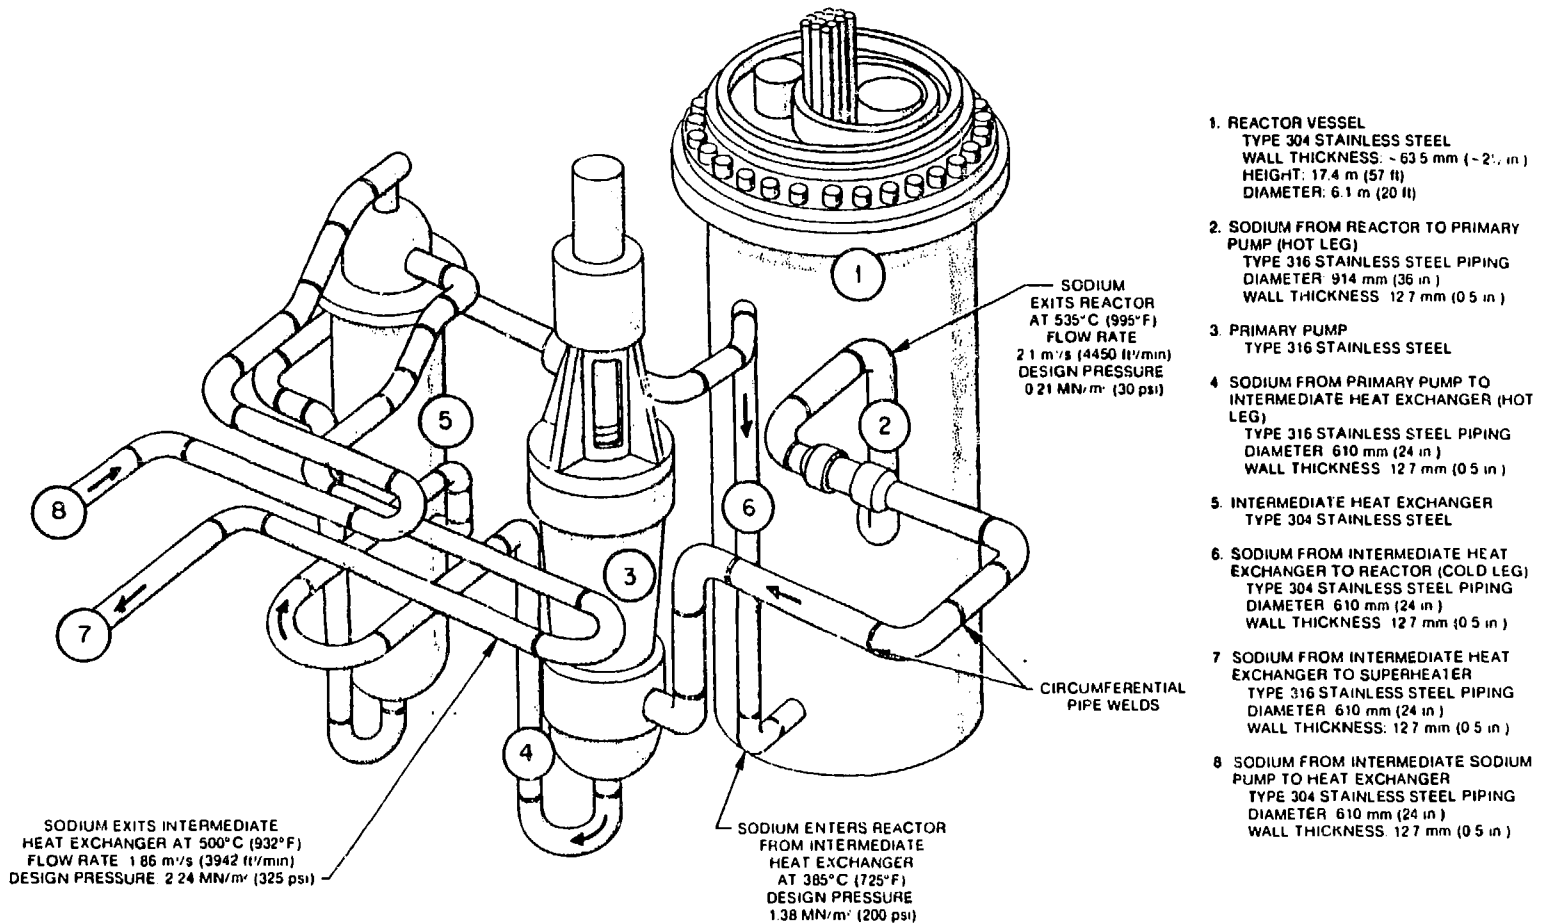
Uses of types 304 and 316 stainless steel and their weldments for out-of-core structures and components of the Clinch River Breeder Reactor Plant (ref. 1).
